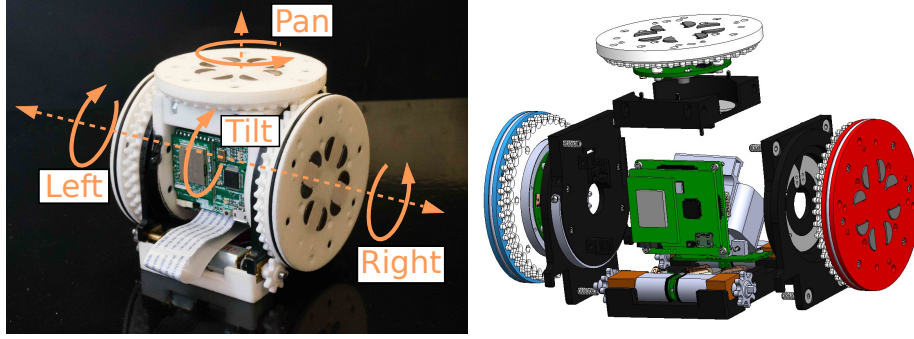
SMORES-EP module (left) and exploded CAD view (right)
